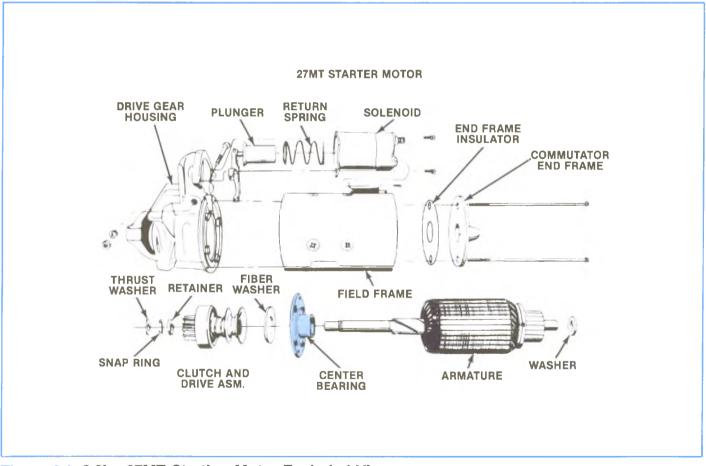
, 6.2L - 27MT Starting Motor Exploded View.
